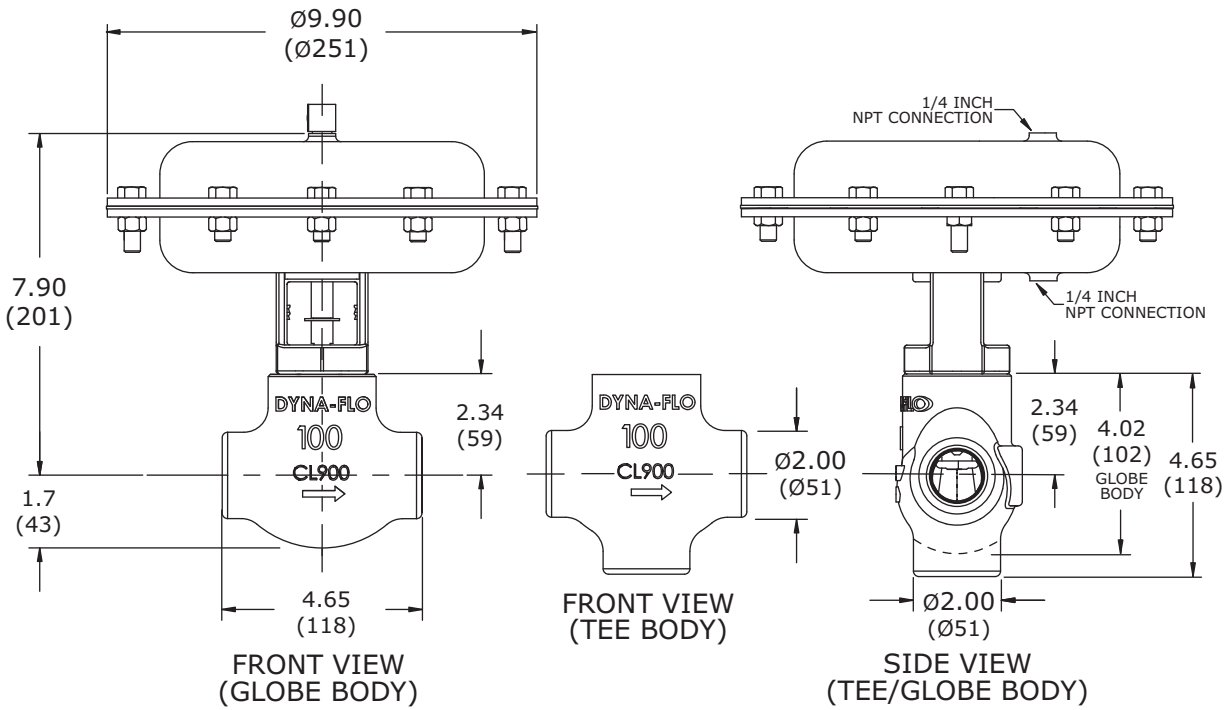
FNPT Style Valve Dimensions (900 Cl. only)
